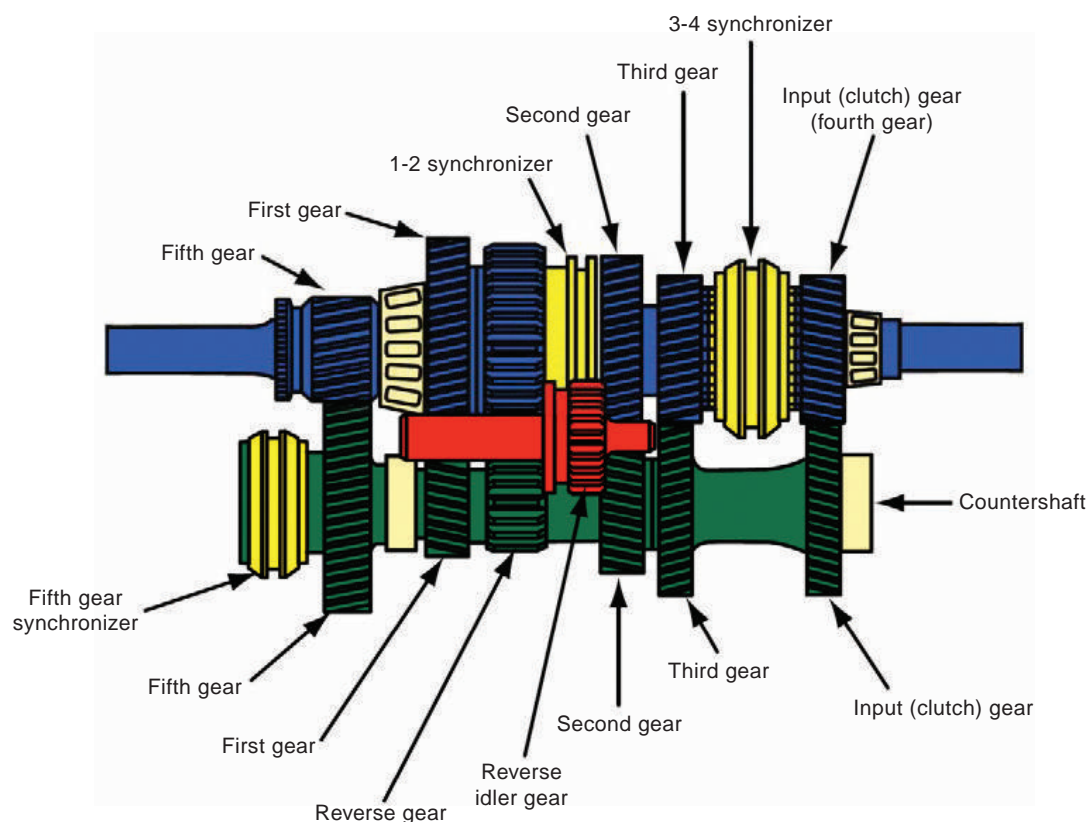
(a) A view of gear arrangements of a 5 speed synchromesh gear box
